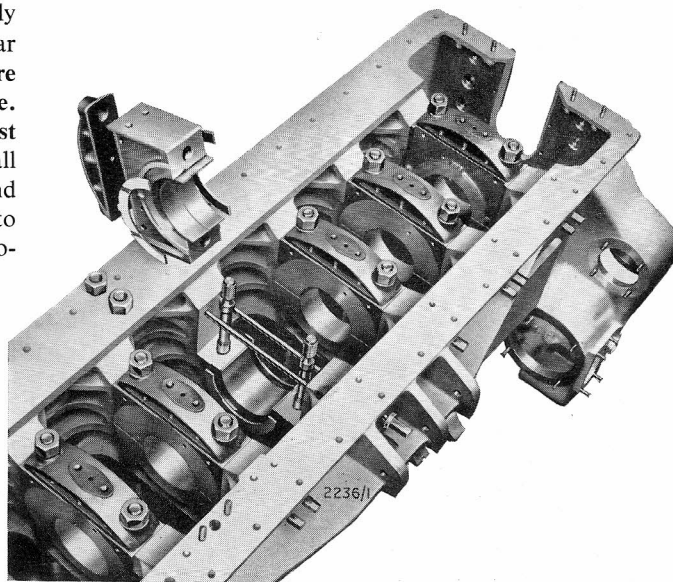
Crankcase fitted with Pre-finished Steel Shell Bearings
